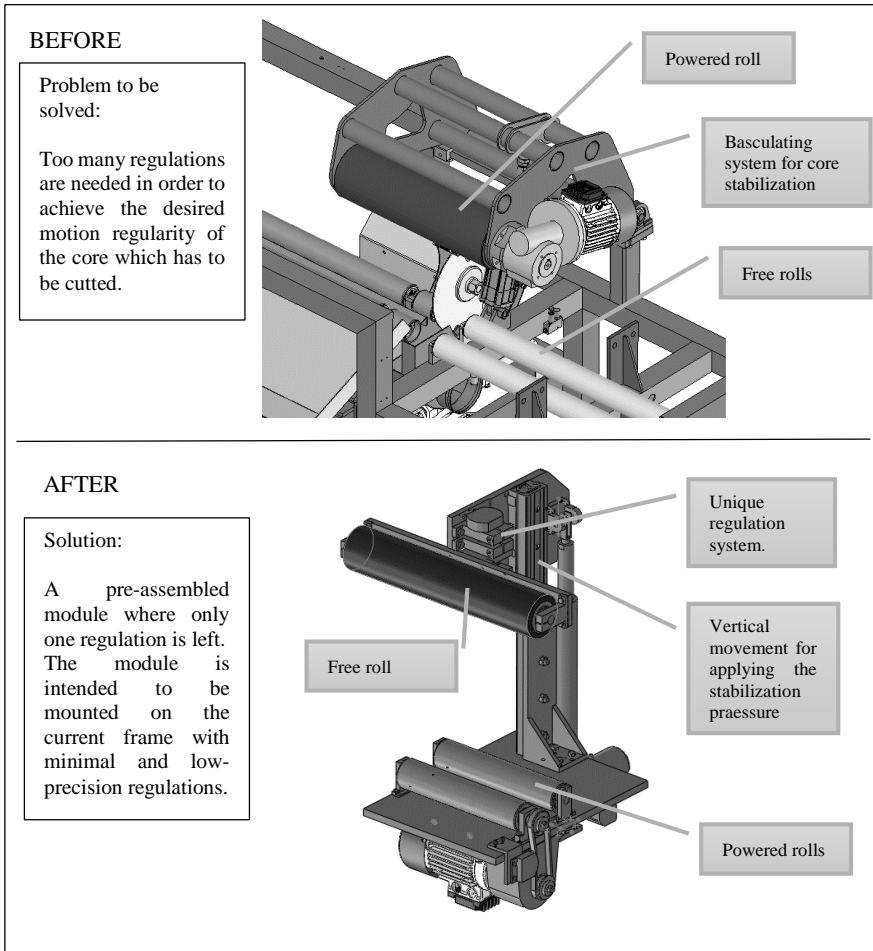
Cutting zone of the core cutter machine, before and after the complete re-design.
